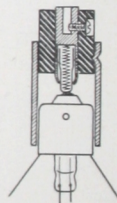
An Undesirable Type of Socket. Doubtful Contact Between Plunger and Sleeve. Spring May Carry Current, Overheat and Weaken. Insulation May Soften Under heat and be Forced Out of Socket
